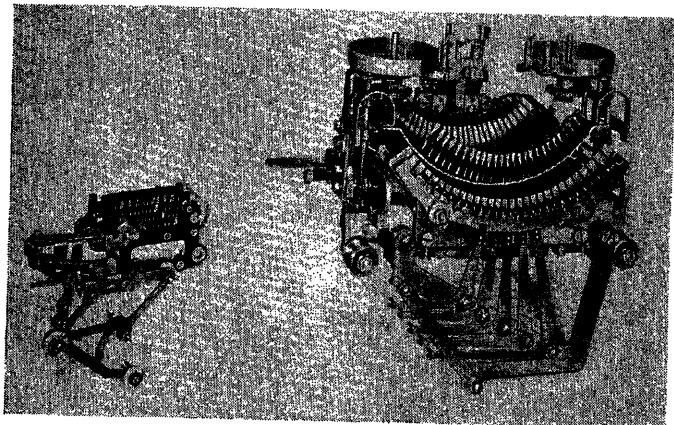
The new typebox assembly weighs only a tenth of the older moving type basket carriage
